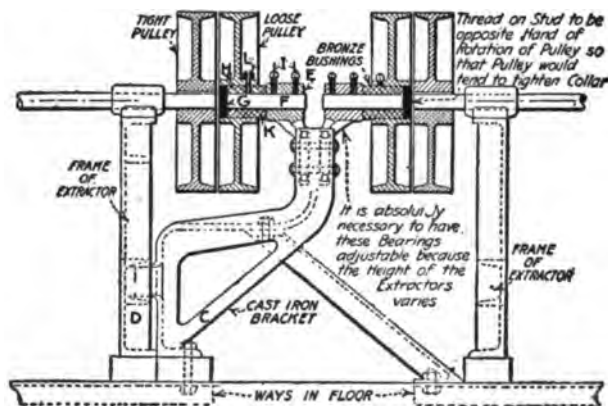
IMPROVED METHOD OF MOUNTING PULLEY
